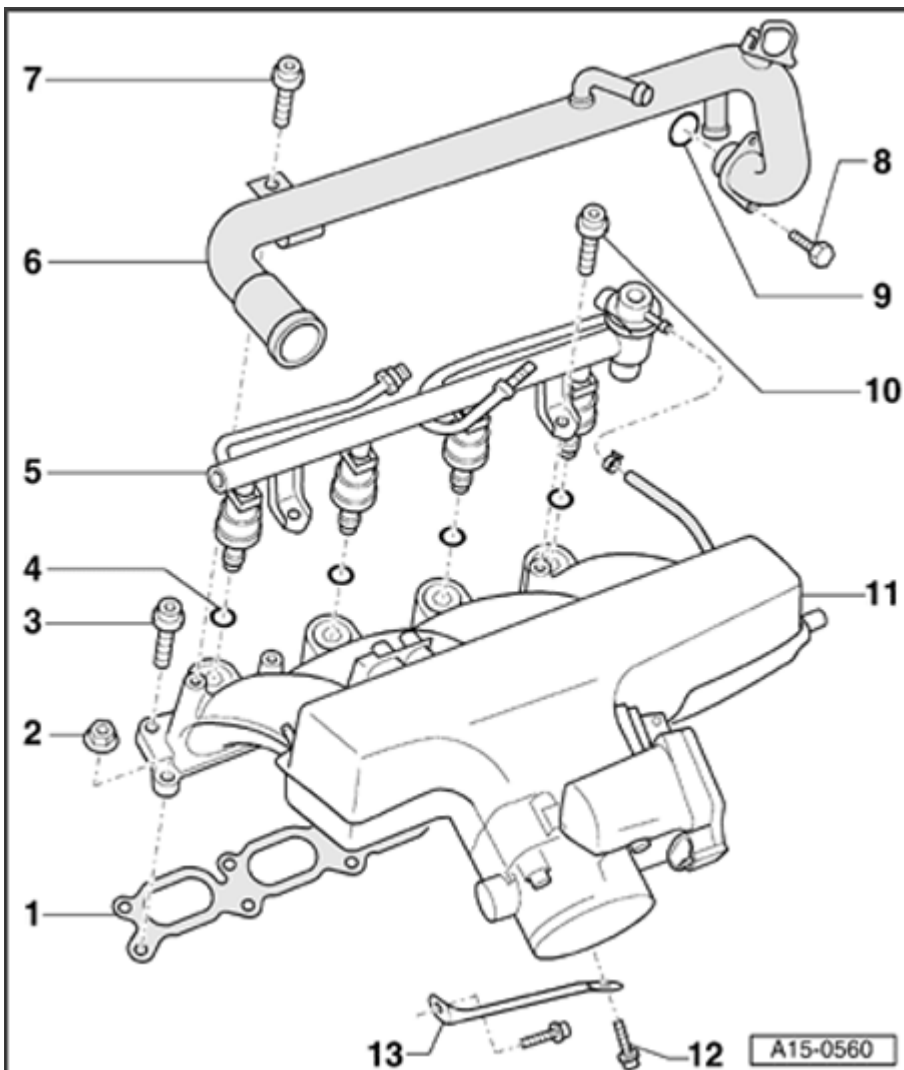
Cylinder Head, Removing And Installing Overview - Part II
